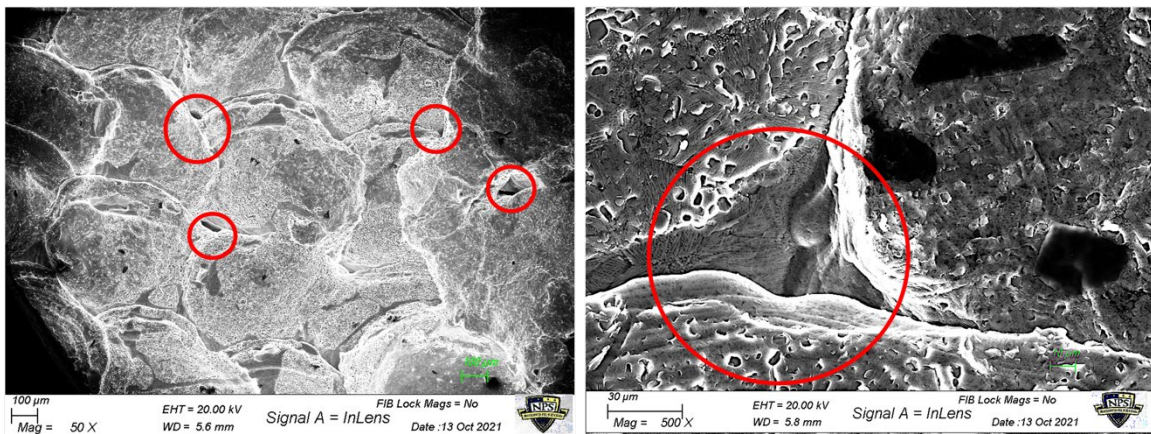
Fractured Surface: Vertical Machined Block
